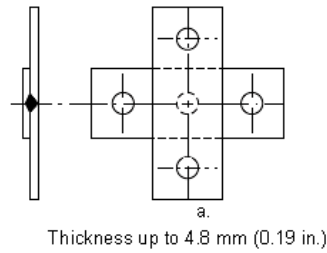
Cross-tension test of Resistance Welding
